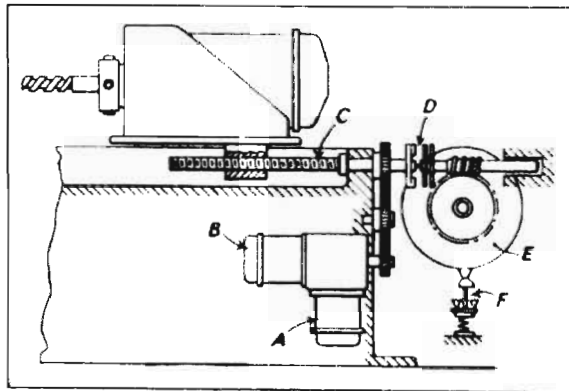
Feed arrangement for deep-hole drilling that intermittently clears chips.
